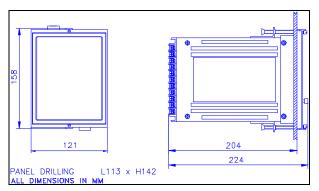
SINGLE MODULE ENCLOSURE MOUNTING
